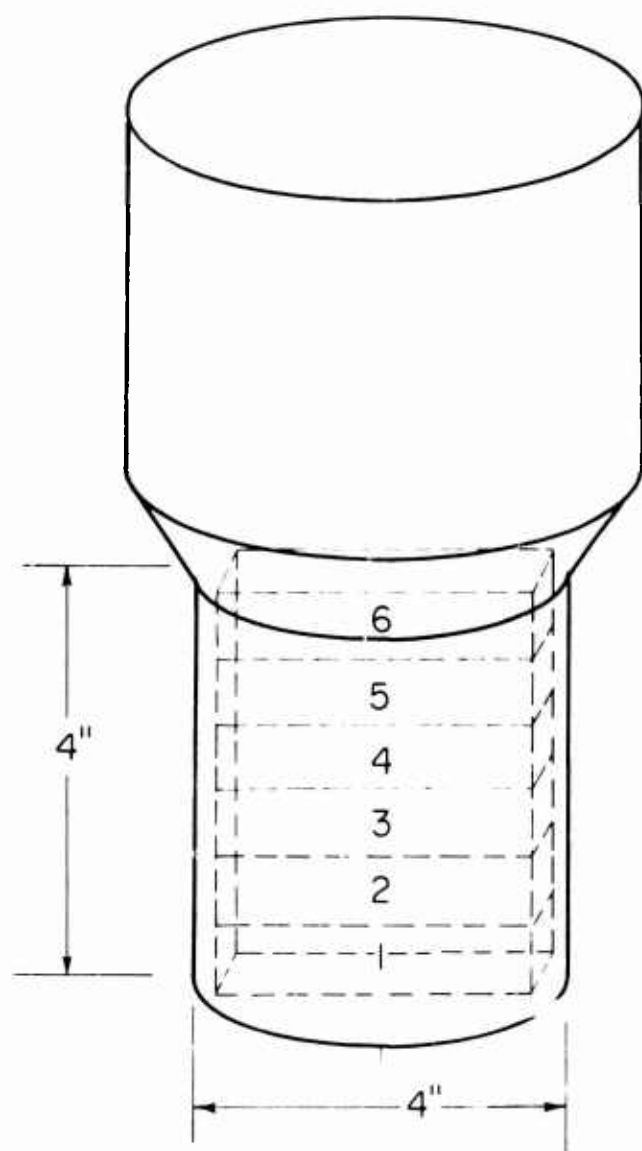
Cylinder Casting Design Showing Test Bar Locations
